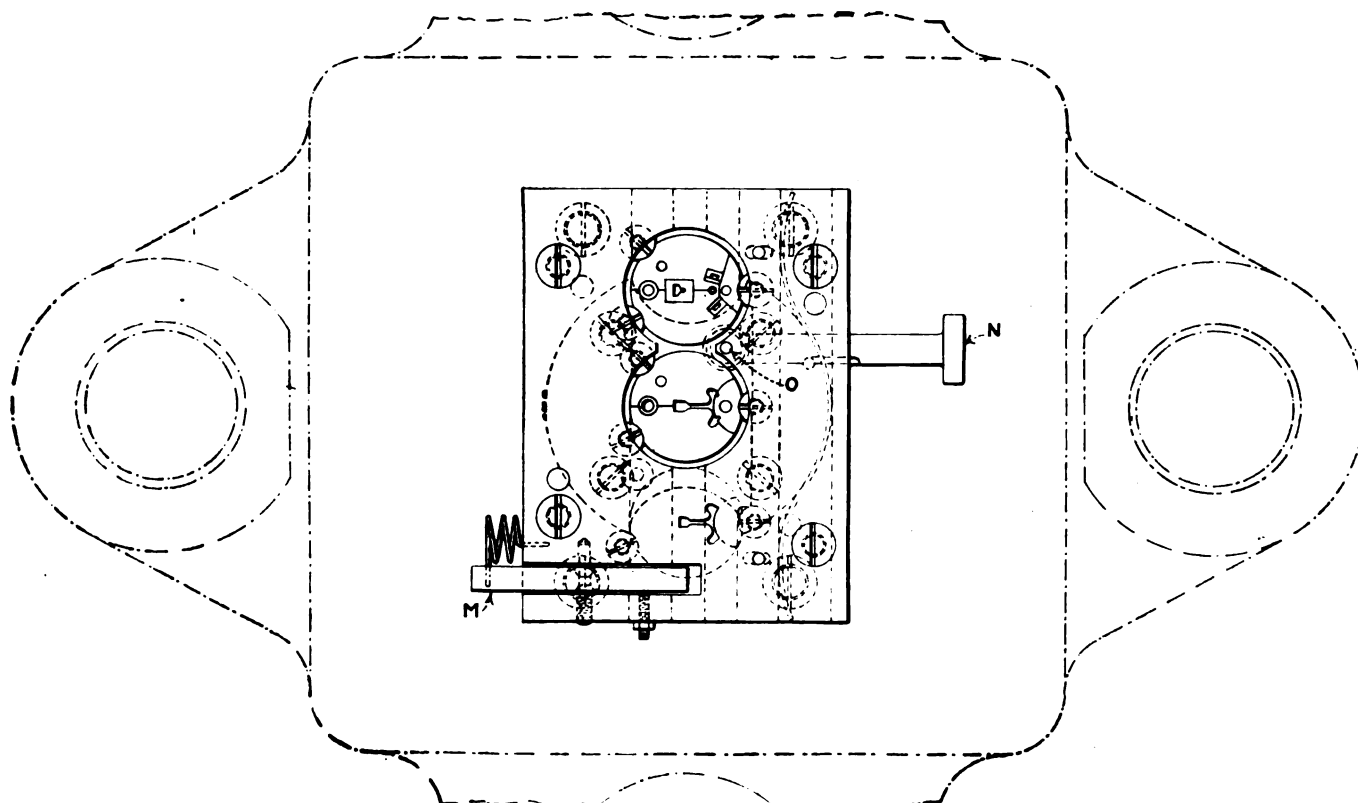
PLAN VIEW OF THE BLANKING DIES
